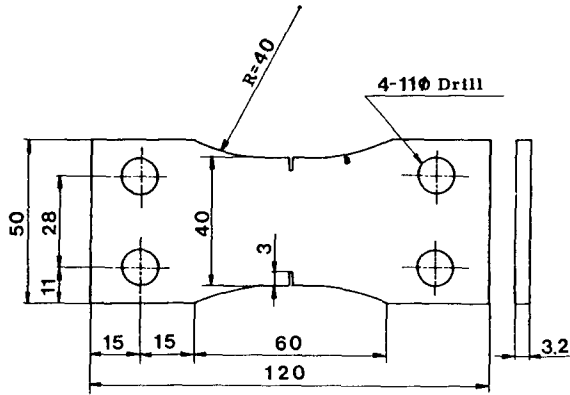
Dimension of specimen for fatigue test.(JIS K 7119)
